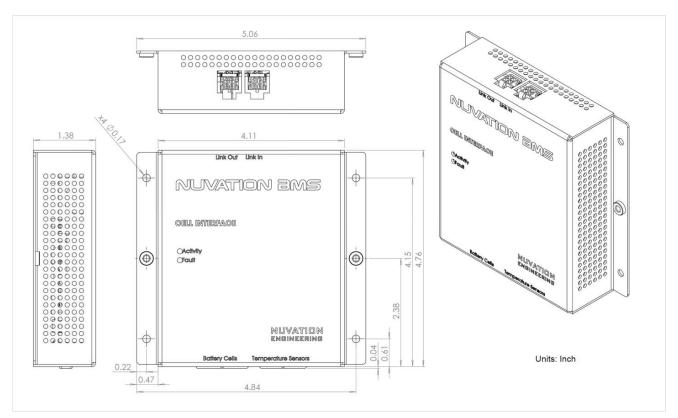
Mechanical Drawing of Cell Interface with Bulkhead Enclosure
